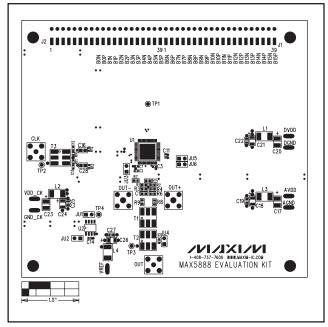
MAX5888 EV Kit Component Placement Guide—Component Side
